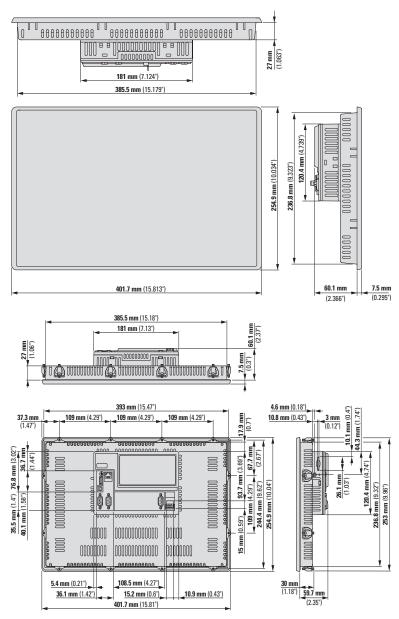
Dimensions for 15.6" front mounting devices in mm (inches)
